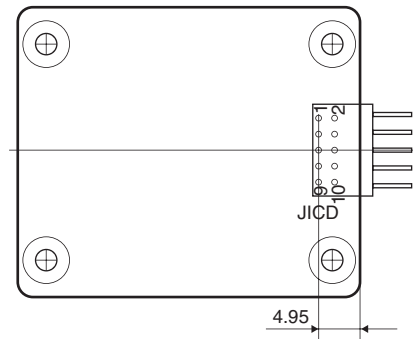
Dimensions of the ICD Board (Back)
